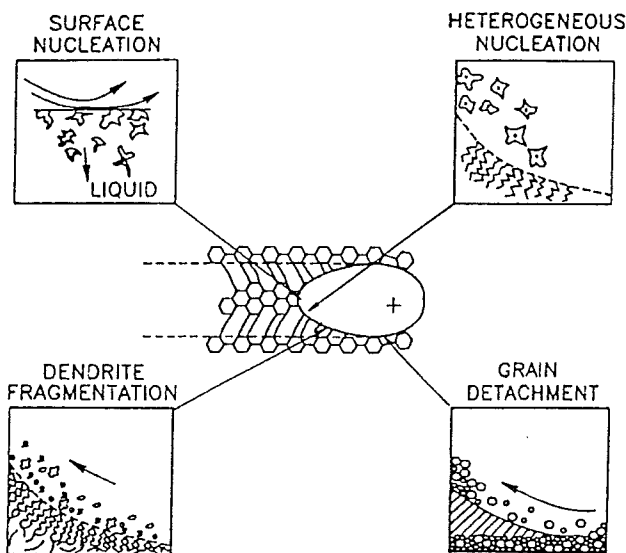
Four mechanisms providing nuclei in the weld pool [4].
